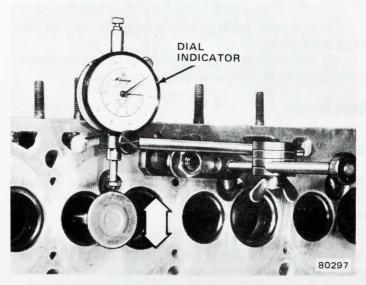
B-25 Checking Valve Stem Clearance with Dial Indicator
